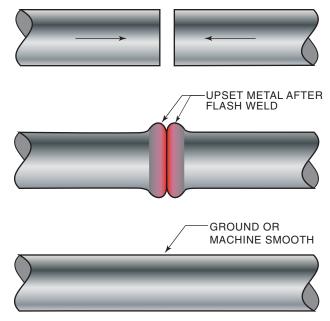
The weld flash is trimmed off after an upset weld.
